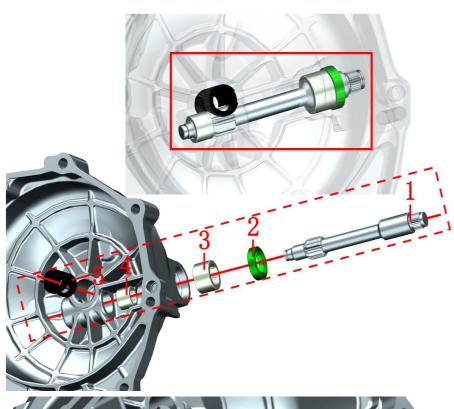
RIGHT CRANKCASE COVER ASSEMBLY		ZT158MJ right crankcase cover assembly-5	CHK	(0)
